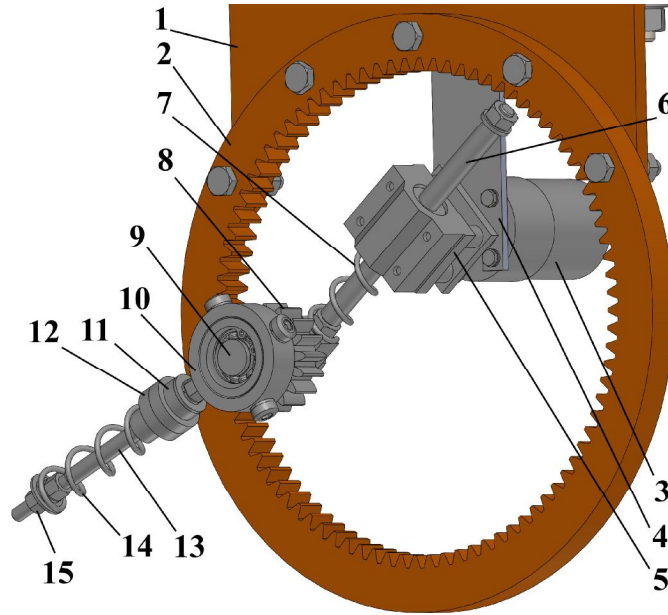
Structural layout of a planetary-type vibration exciter [13]: 1 – plate; 2 – ring gear; 3 – driving motor; 4 – plate; 5 – guide (linear) bearing; 6 – carrier bar; 7 – coil spring; 8 – planet gear; 9 – axis; 10 – casing; 11 – rubber damper; 12 – guide (linear) bearing; 13 – guiding bar; 14 – coil spring; 15 – nut [13]
